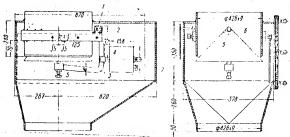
VTI winker with radial dust descent. 1, axle; 2, knife-edges; 3, beam arm; 4, counterweight; 5, pin; 6, cone valve; 7, casing.
